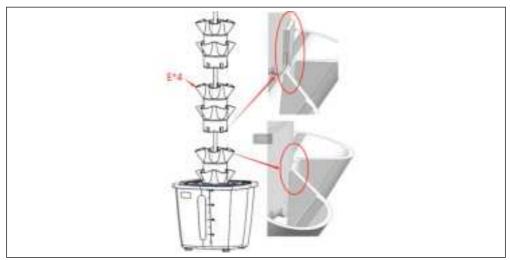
Pass the hose through the two water towers according to the figure, and then stagger the water towers 36° to the assembled water tower below, and install the remaining 1 group of water towers in turn.
